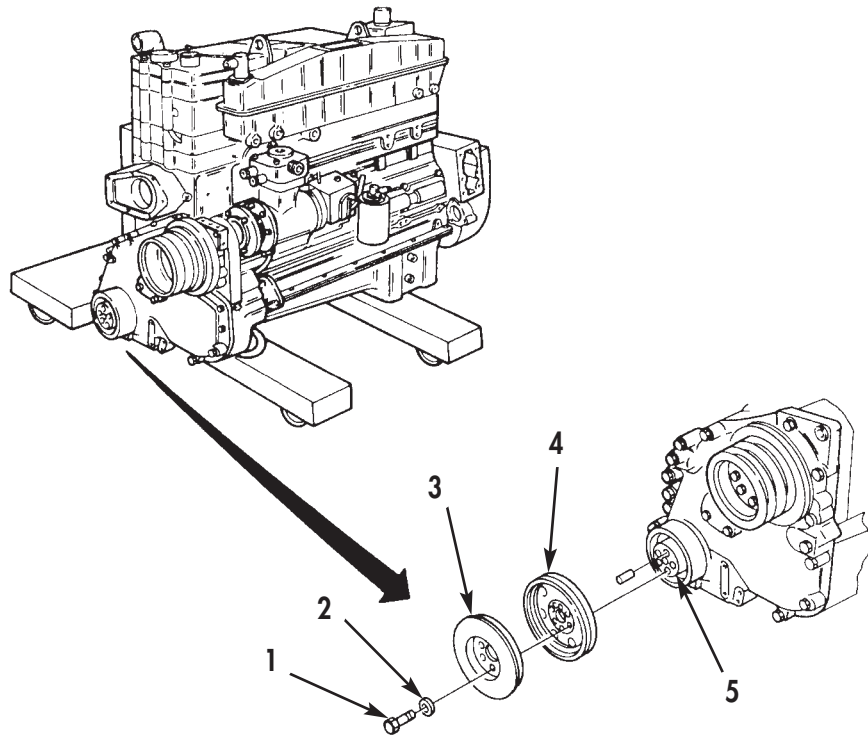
Vibration Damper and Crankshaft Pulley Removal.
